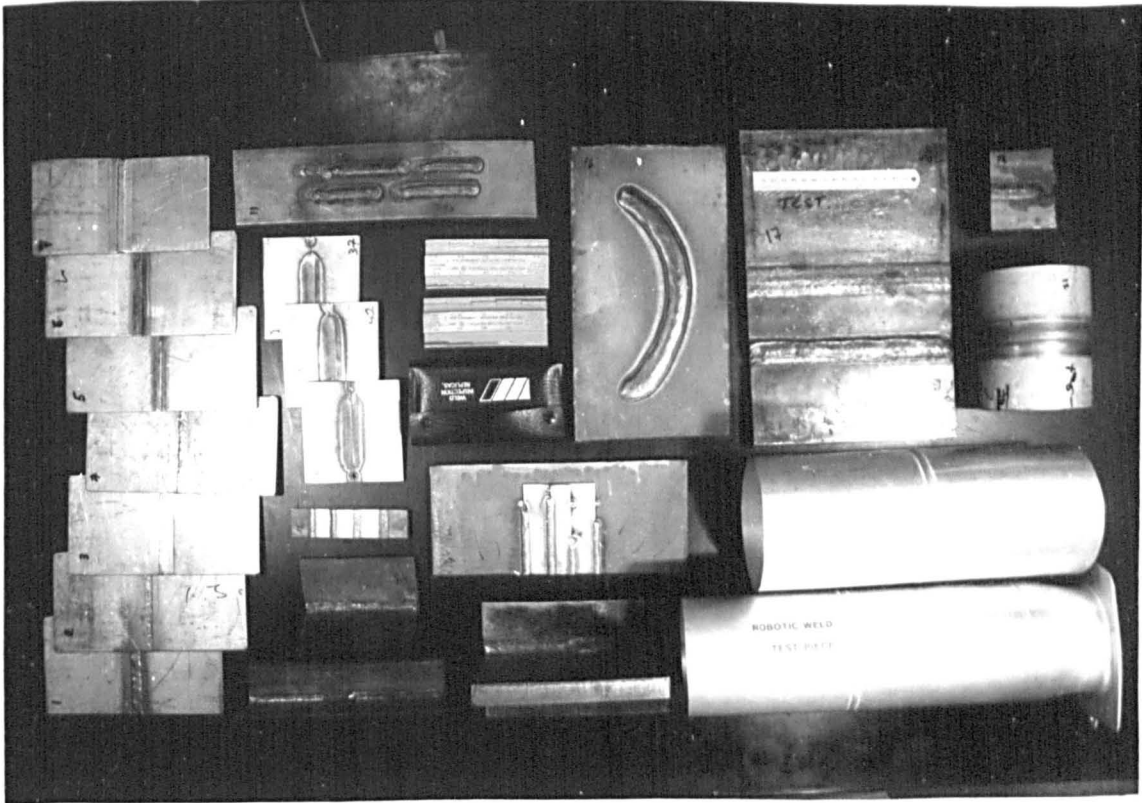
A selection of weld samples used to test the gauged
